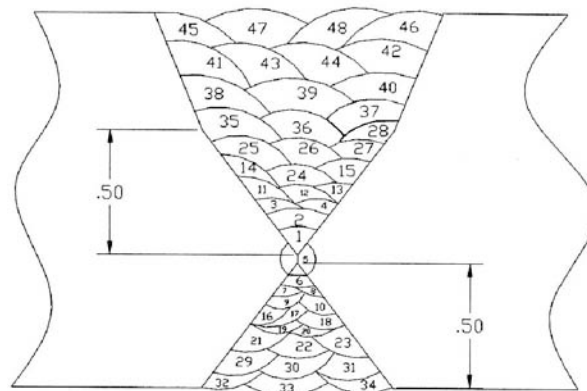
Schematic of the weld joint design and weld passes (dimensions are in inches).
